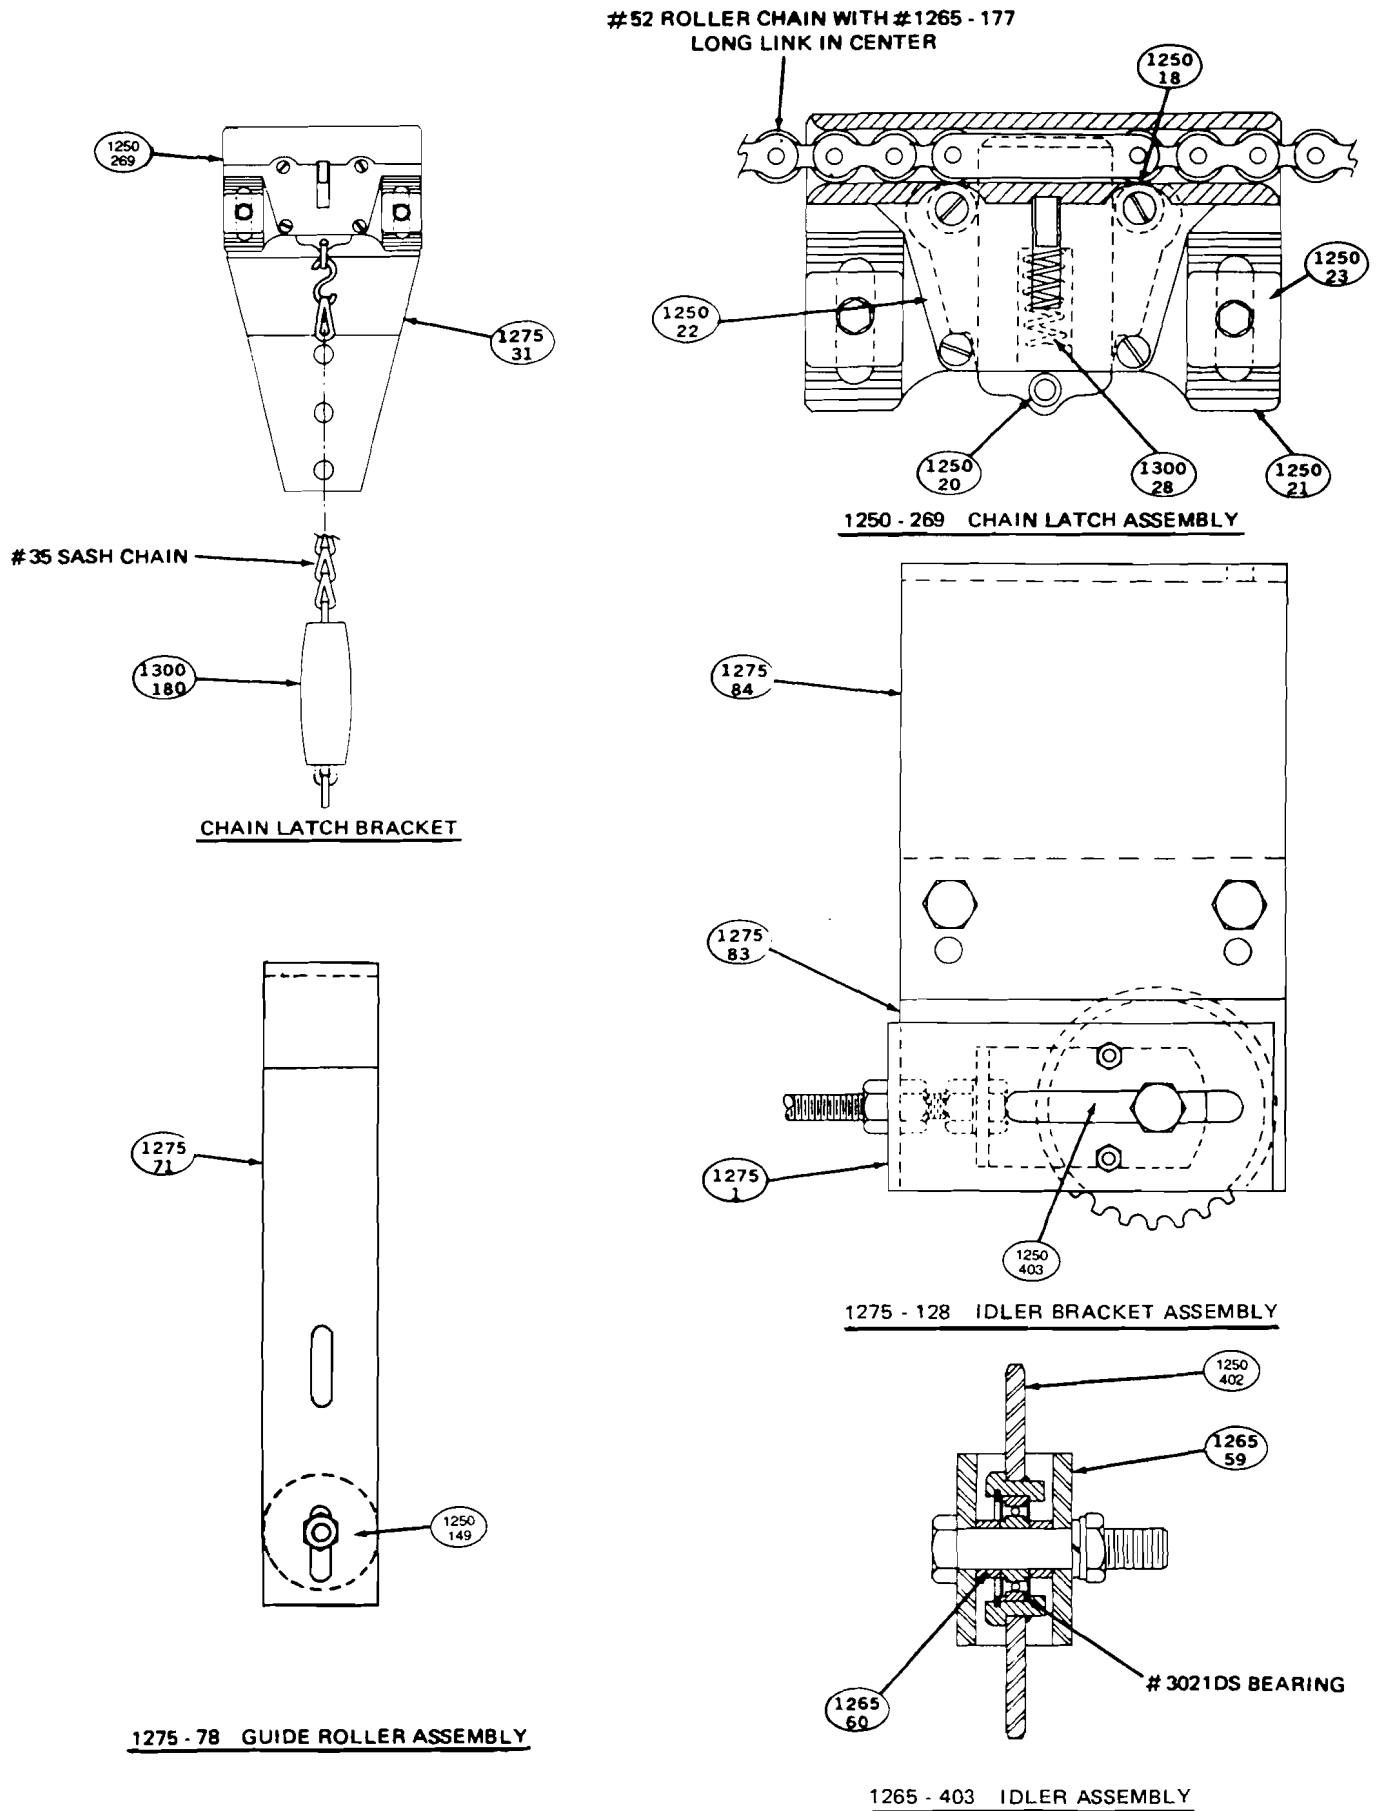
Illustration of Parts - 1295 Operator Bi-Parting Top Hung Gate Hardware
